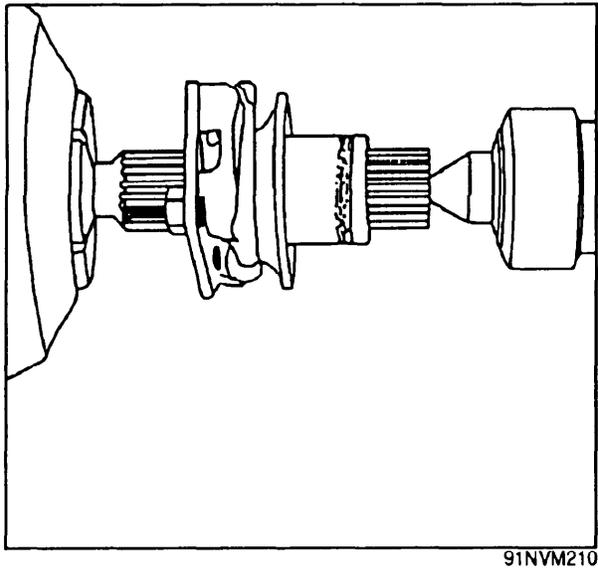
Machining the overlaid section of an output shaft to its original dimensions.
